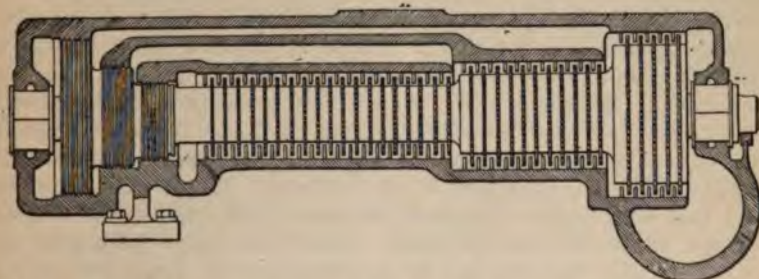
Section of Parsons Turbine, showing the Equalizing Pressure Rings at the Steam End.
